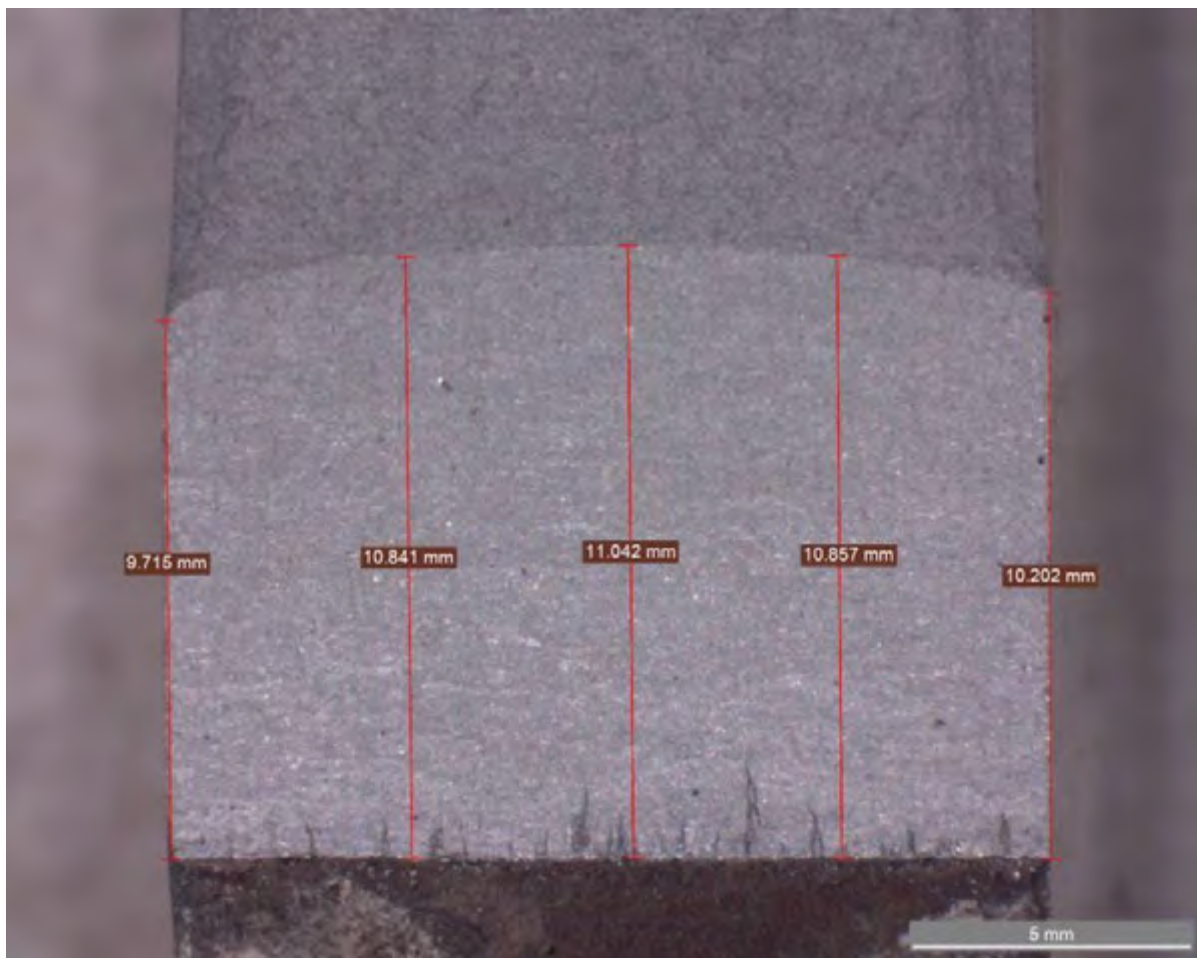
Crack length measurement of fracture surface of specimen FLAT – 2.
